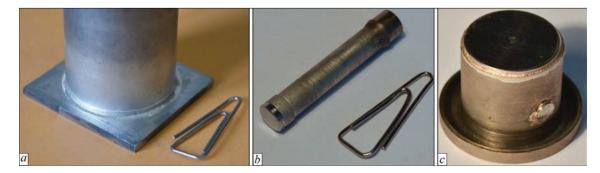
Brazed specimens of dissimilar materials kovar-titanium alloy: model specimen for tests on sealing (a); tubular element (b); brazed assembly with plug (c)
